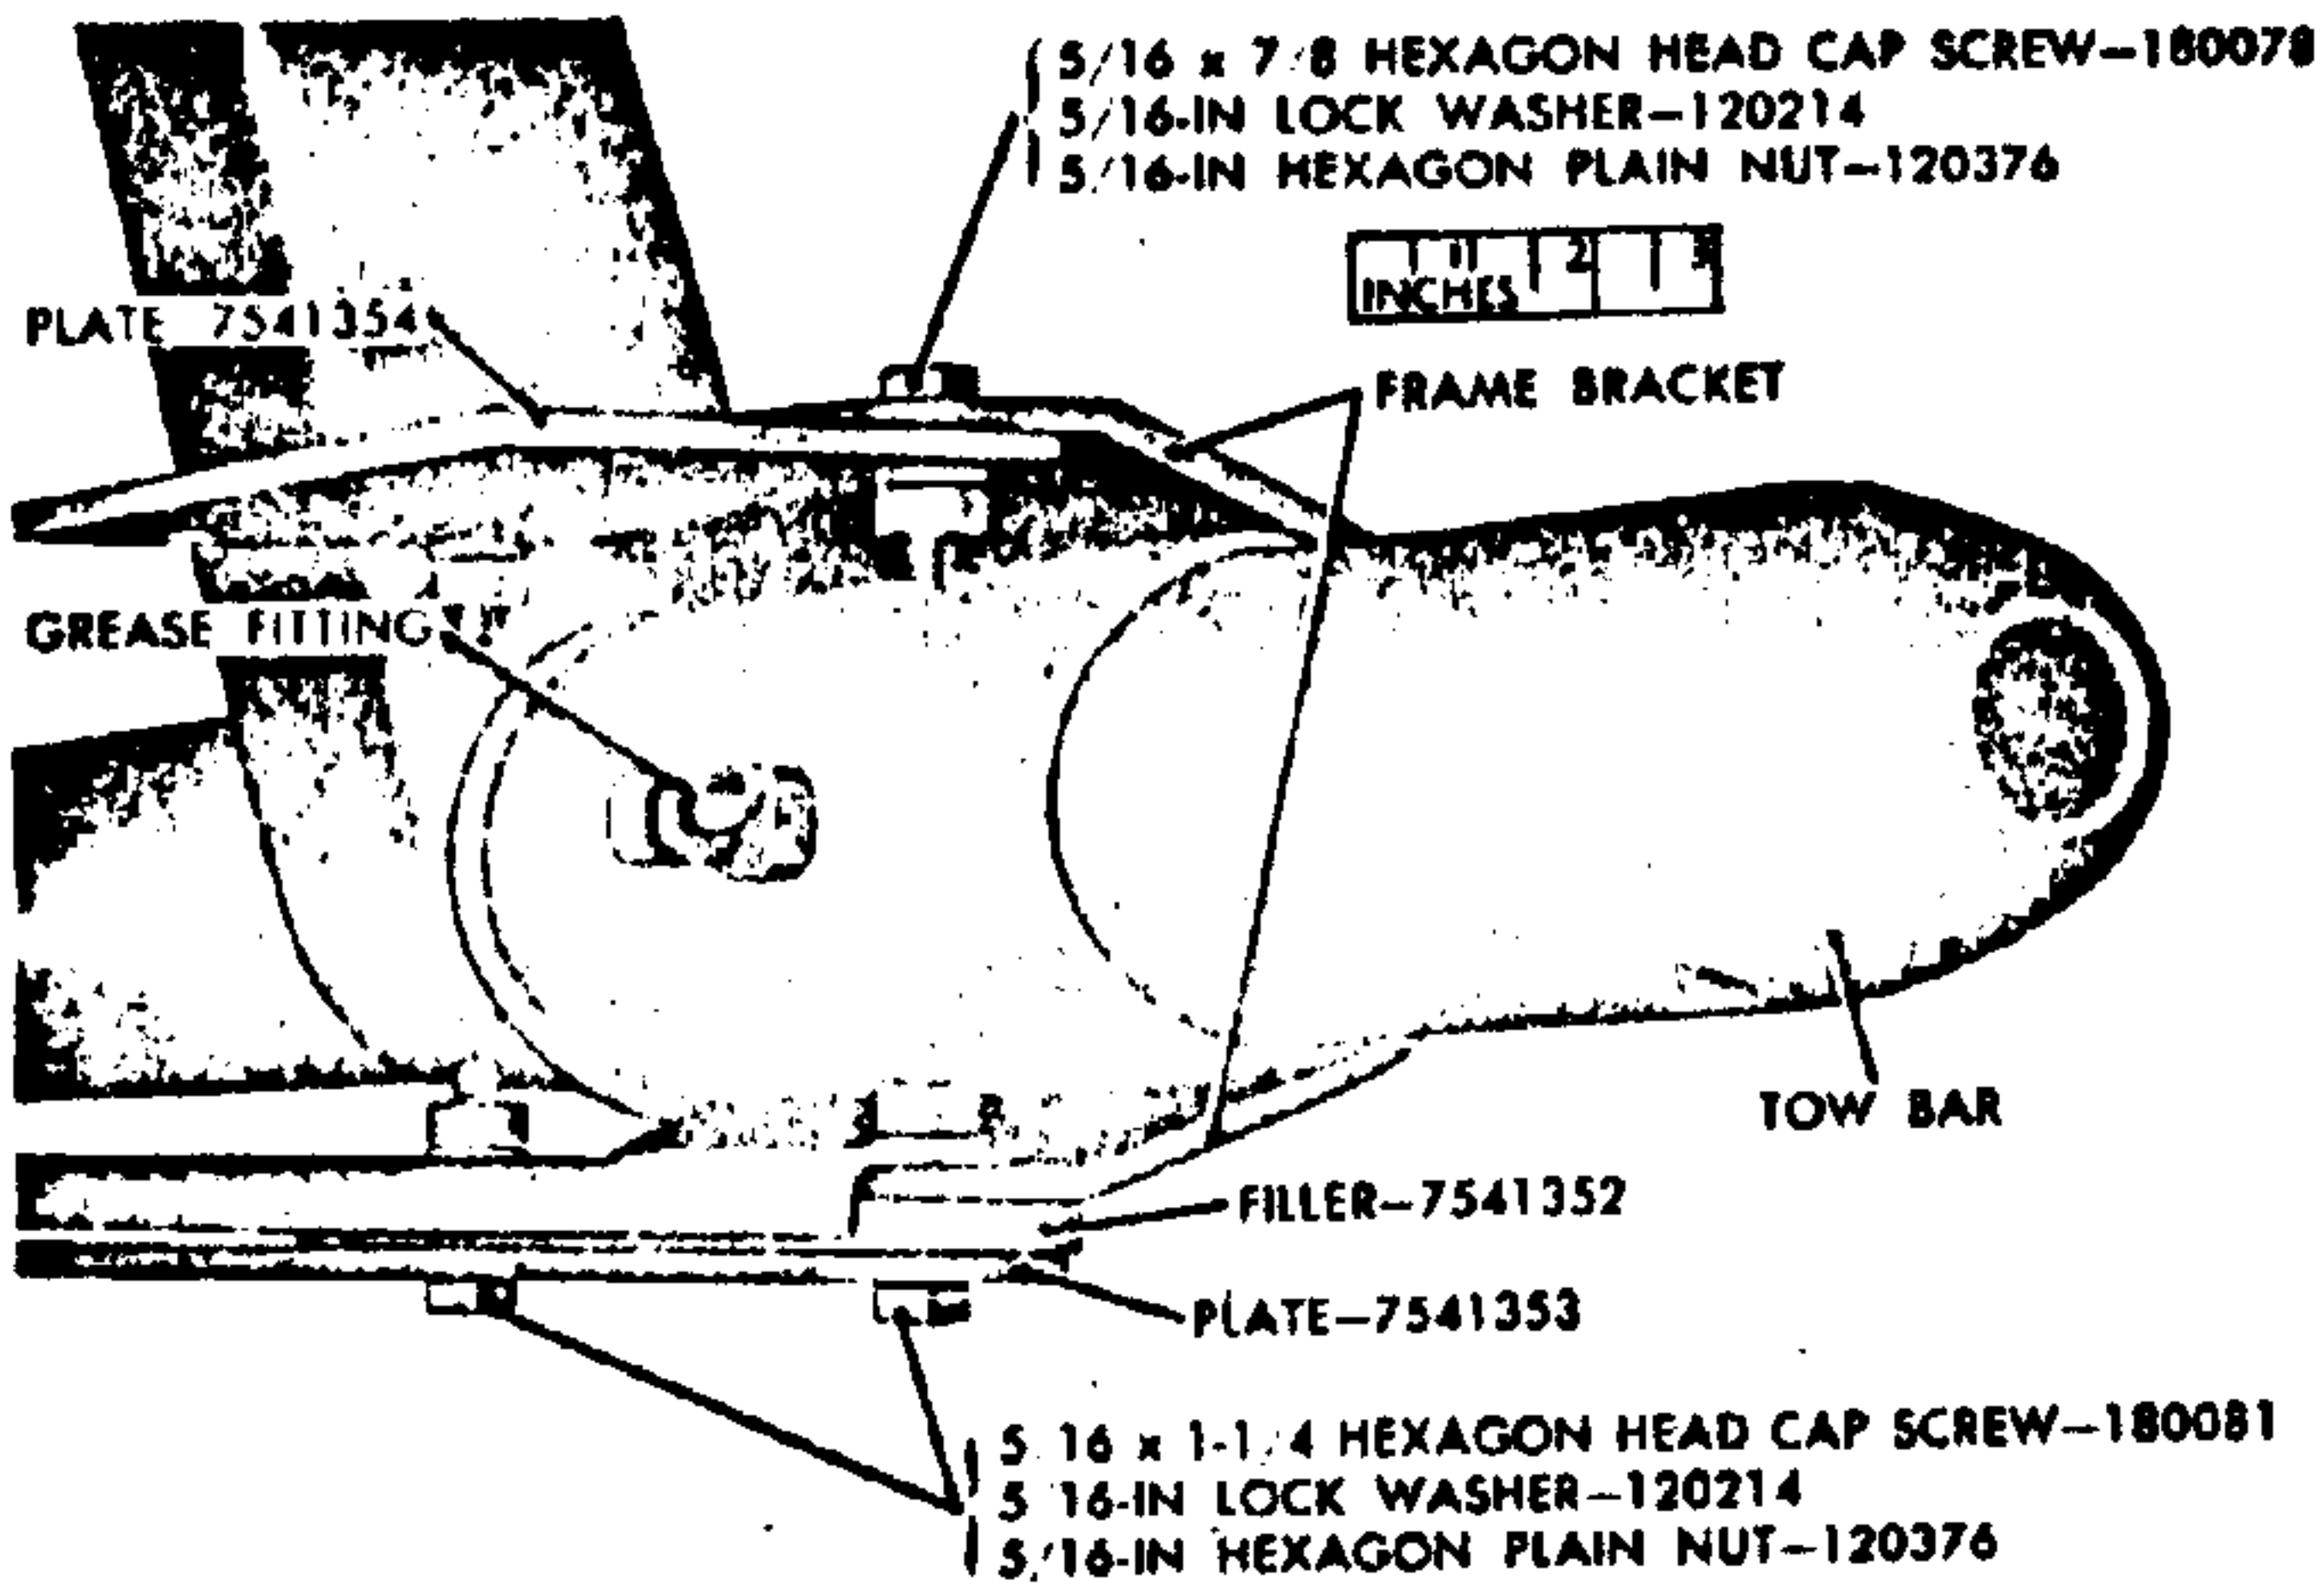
Filler and plates installed on the tow bar and frame bracket assembly.
